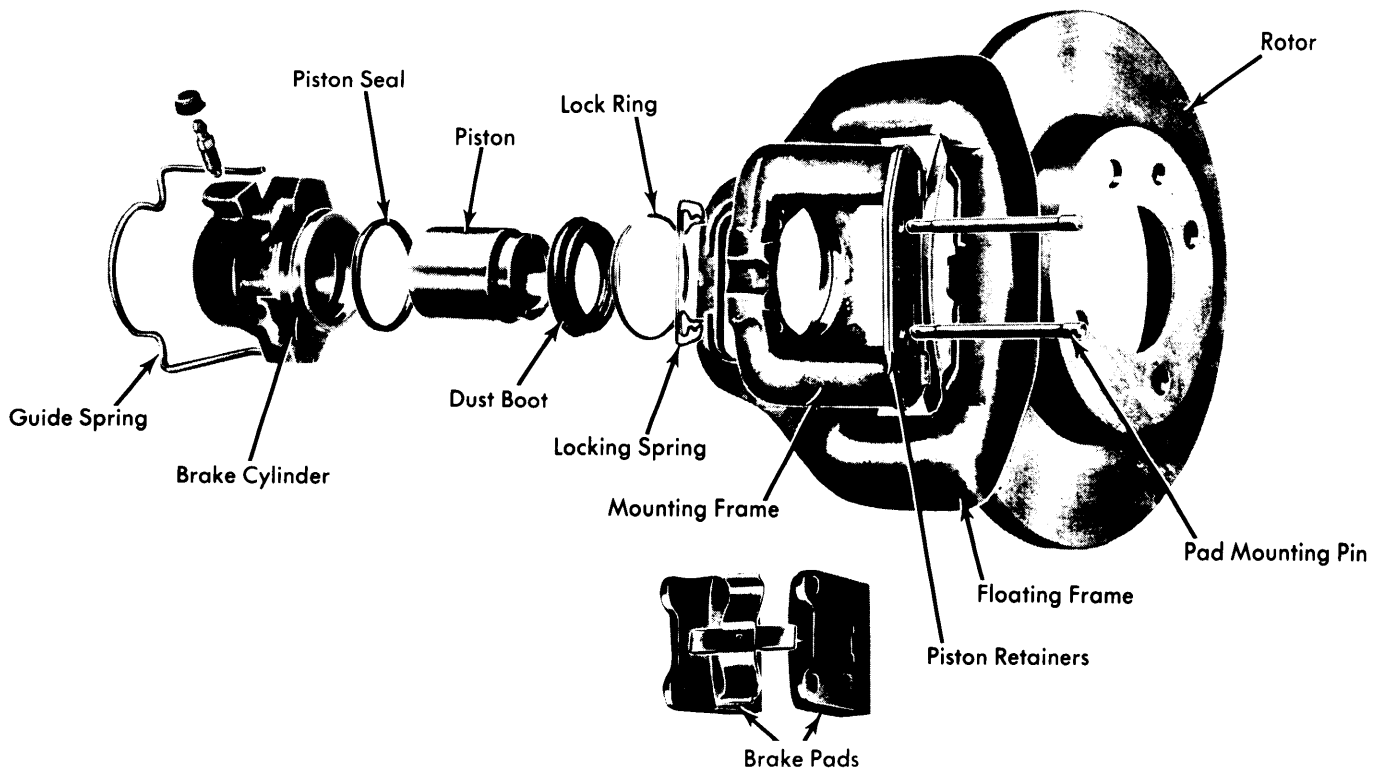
Exploded View of ATE Disc Brake Assembly Used on Dasher, Rabbit and Scirocco
